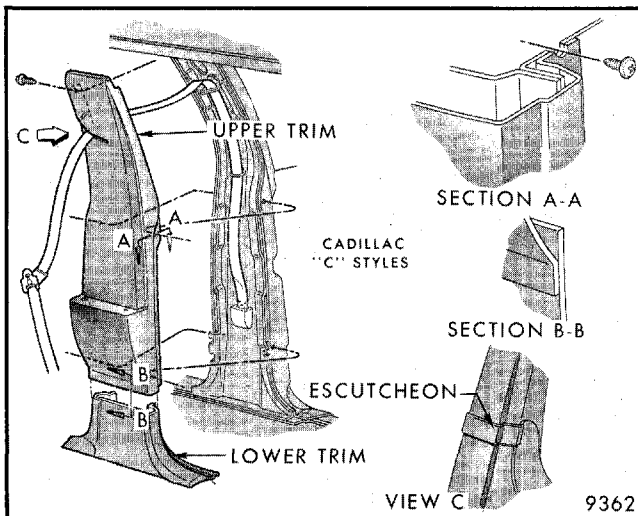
Center Pillar Trim Attachment - Cadillac "C" Styles
